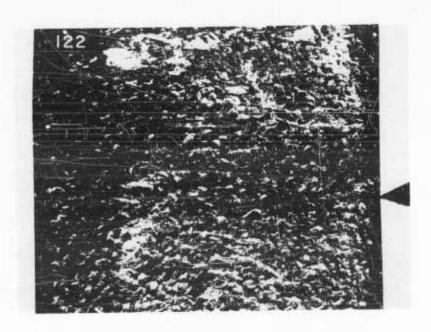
FAILURE IN SPECIMEN NO. 122
